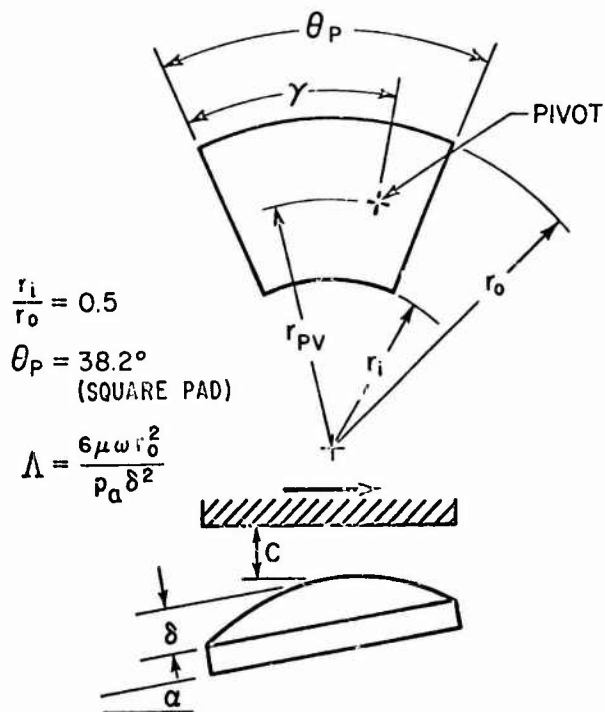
TILTING PAD THRUST BEARING GEOMETRY
